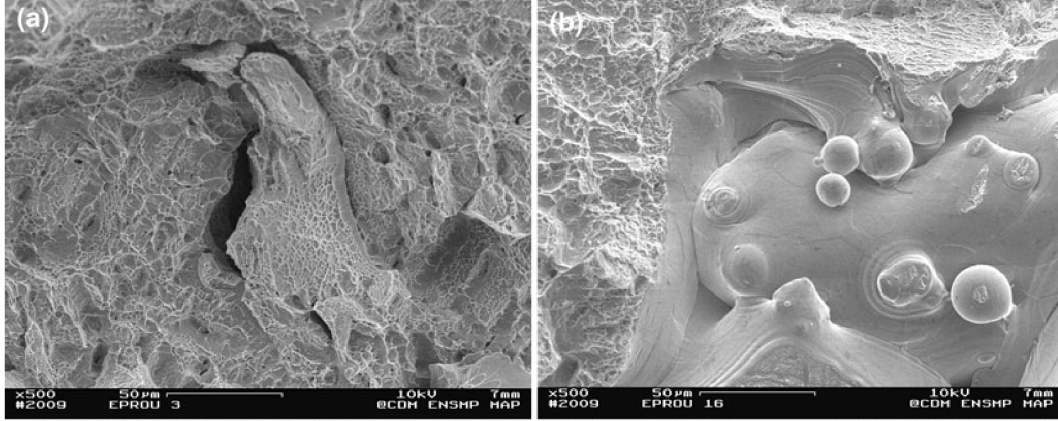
Fracture surfaces on tensile test specimens of as-fabricated microstructure. (a) longitudinal direction and (b) transverse direction. Figure from [34].
